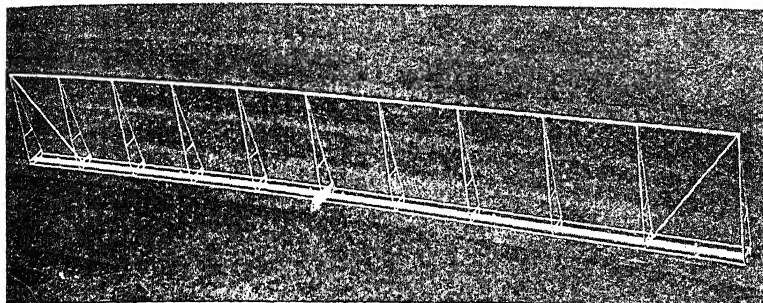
CURTISS "ROBIN"—WELDED STEEL TUBE AILERON
